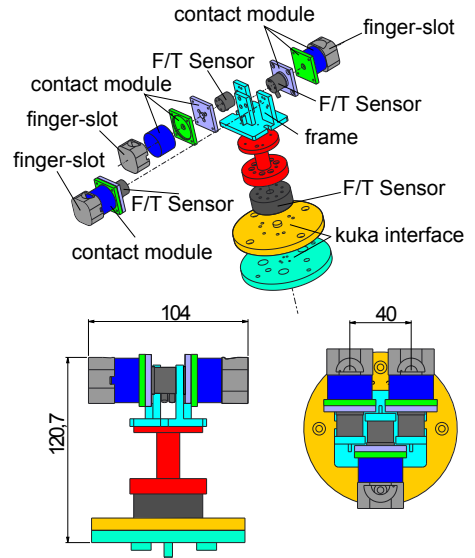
Exploded drawing view of the Tripod Device and its main features with dimensions in [mm].
